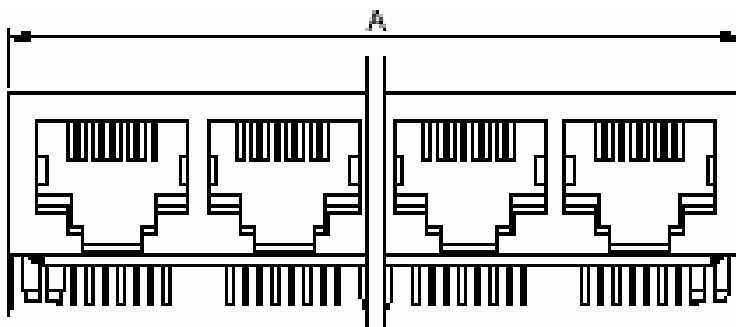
Shielded RJ45 connector on PSB board (front view) ERNI MJHS-G cat5e
